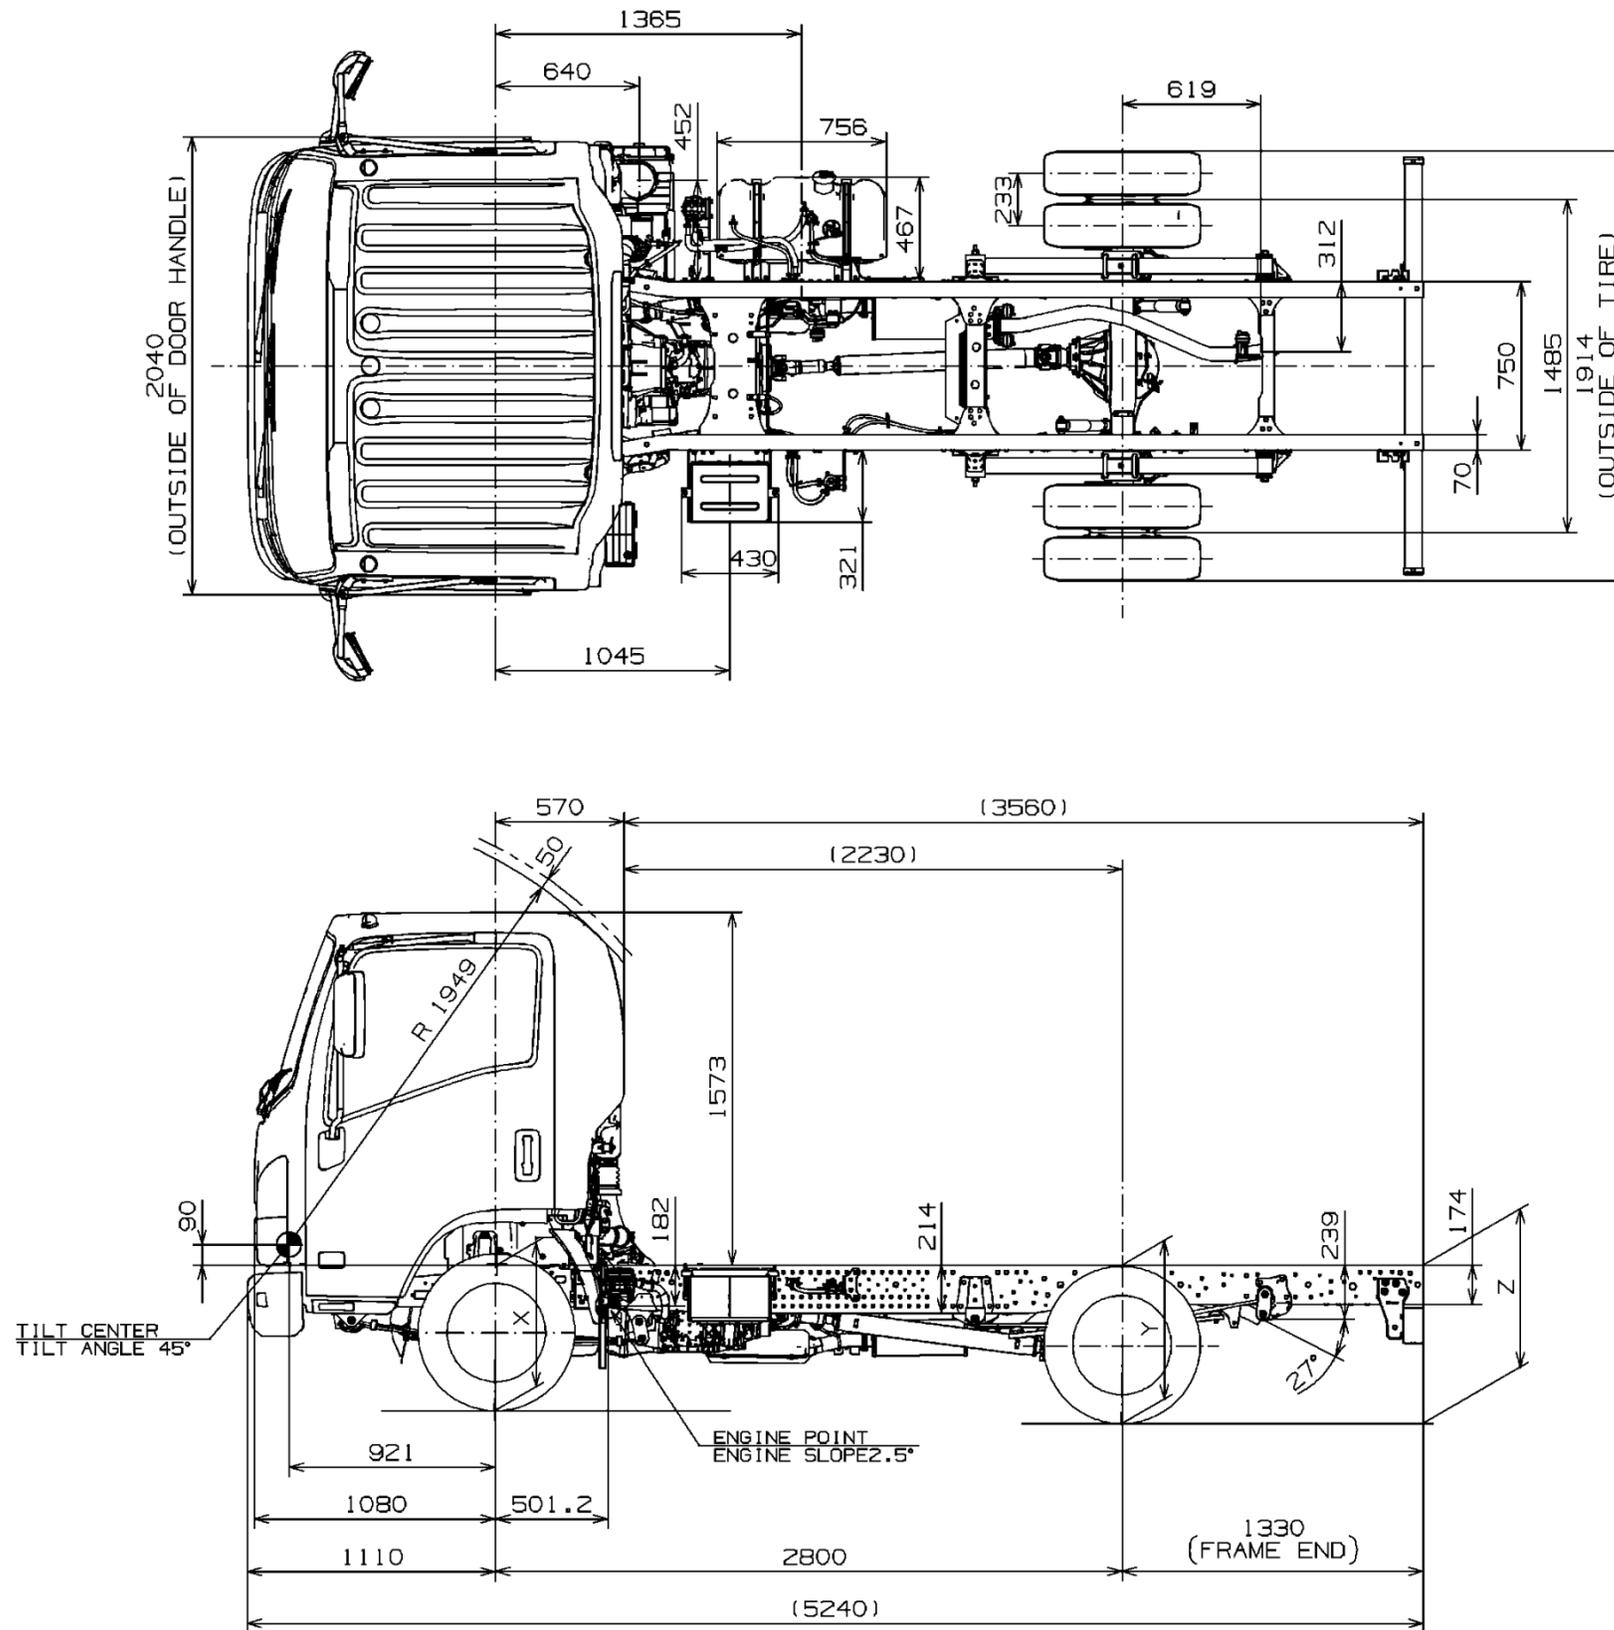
Cab Chassis Drawing NNR85L/U-HD5AYEN
